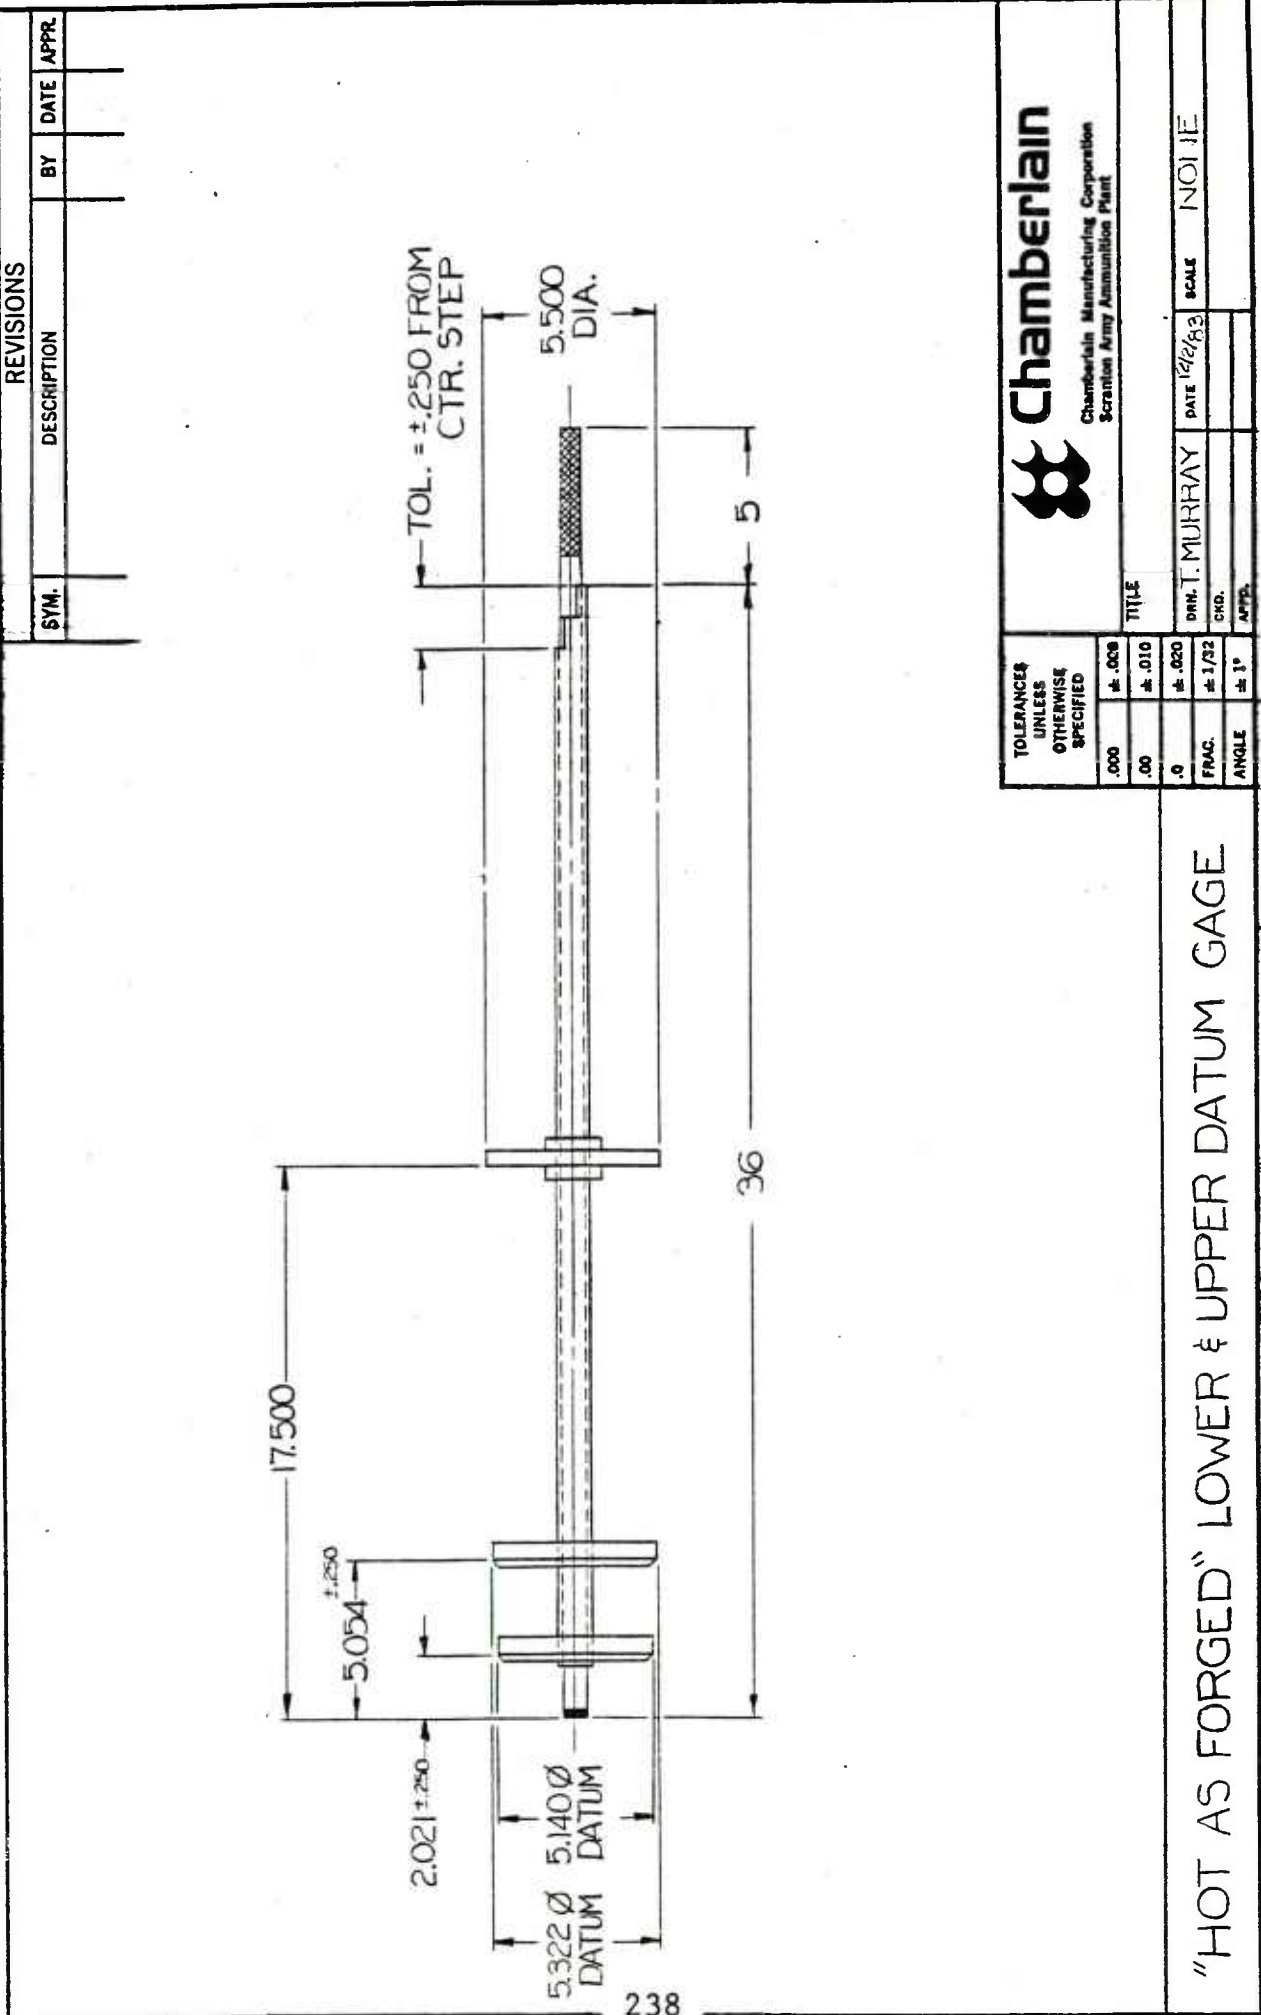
Datum gage utilized for the inspection of the "hot" forgings.
